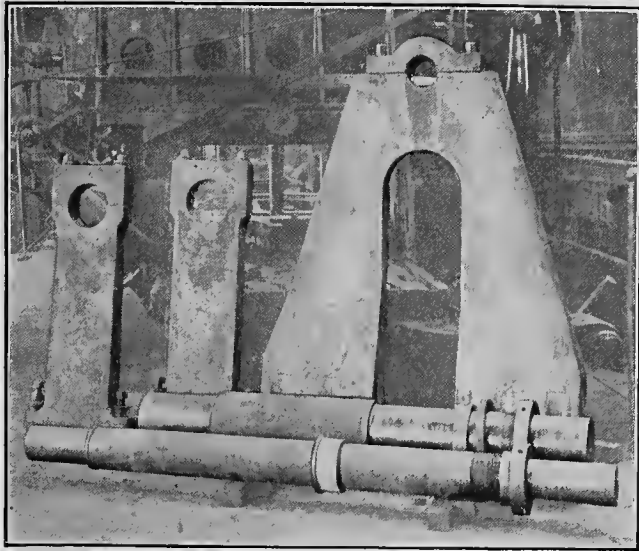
FIXTURES USED IN BORING PRESS FRAMES AND LOCOMOTIVE AXLES USED AS ARBORS
